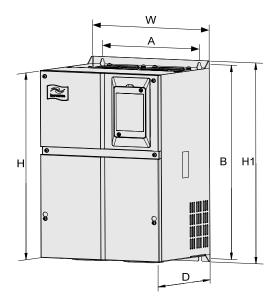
Mounting dimensions of the sheet metal structure (18.5–30 kW)
